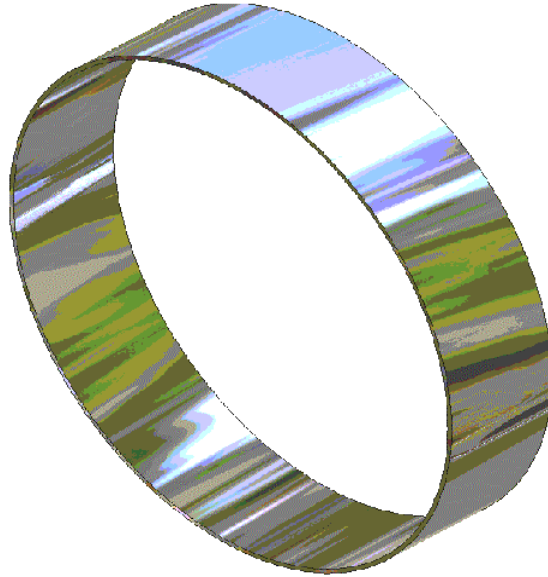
TS mandrel inner shell - 1/4 inch plate.
